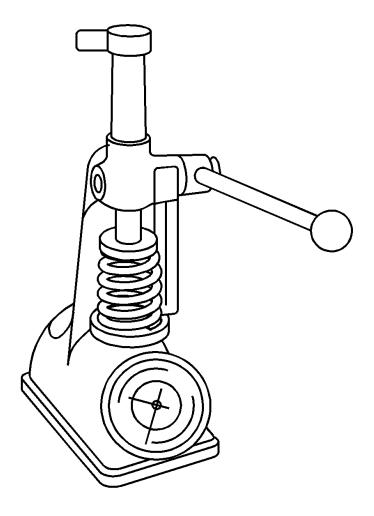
Measuring Valve Spring Tension Courtesy of GENERAL MOTORS COMPANY
